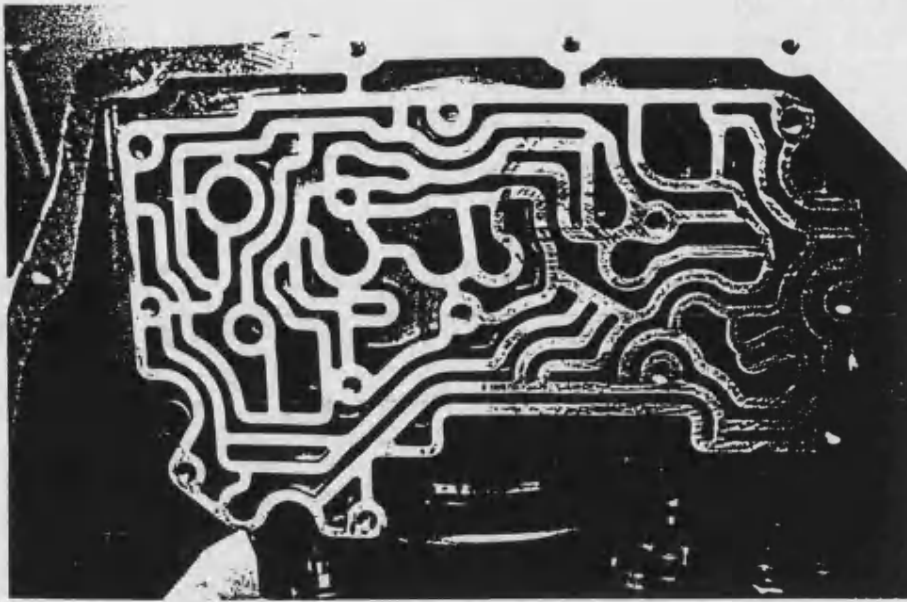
Interface between control manifold and CTX casing. The control manifold (below) houses all valves. The two faces are bolted together "sandwiching" a gasket plate.
